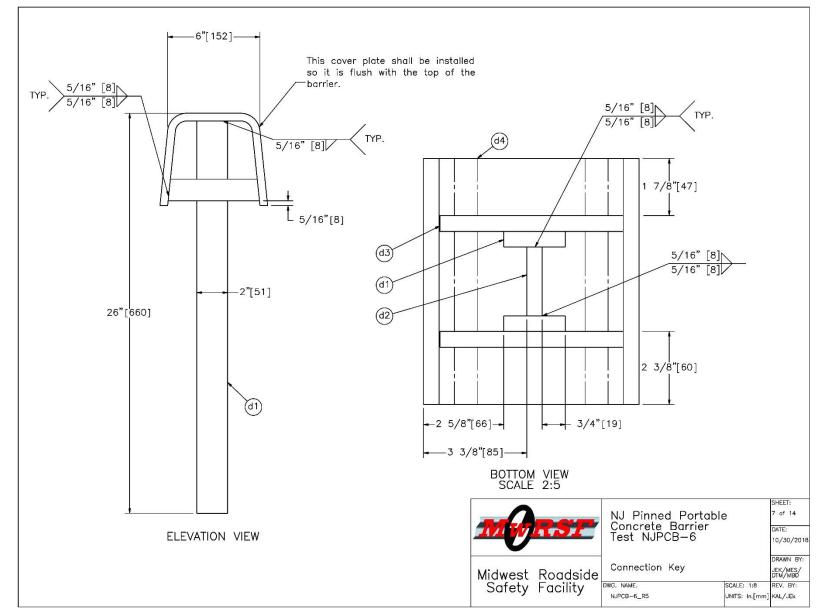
PCB Connection Key Assembly Details, Test No. NJPCB-6
